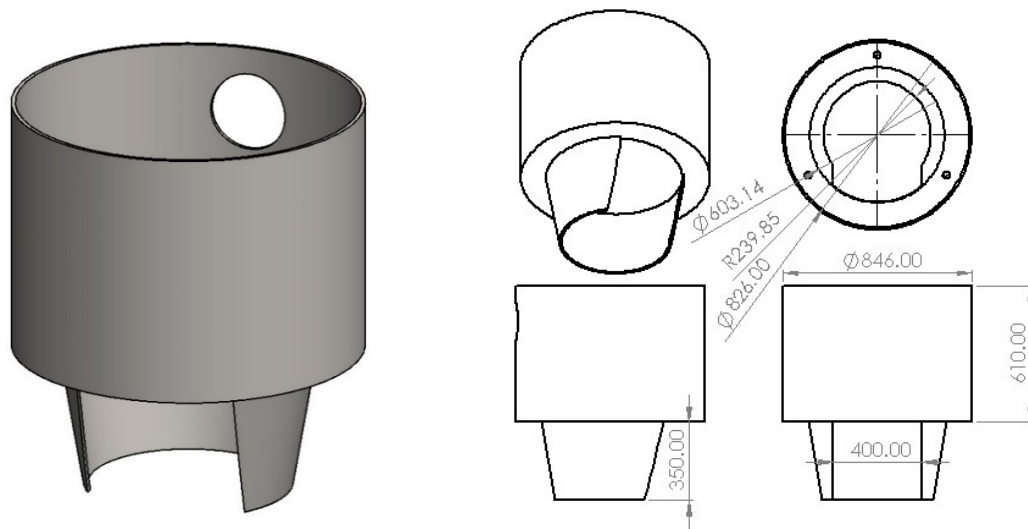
Inner Sheet Metal with its dimensions of Conical Cook-Stove Model.
